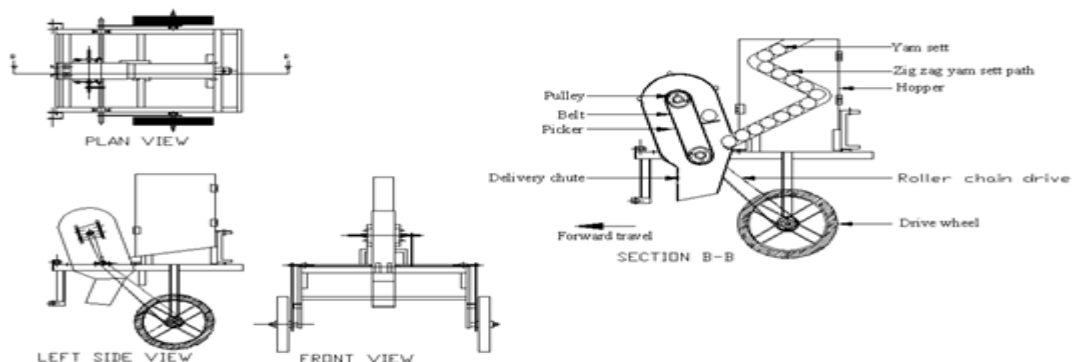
Orthographic views of the Metering Device in 3rd angle projection. To show components, safety shields on chain drives have been removed
